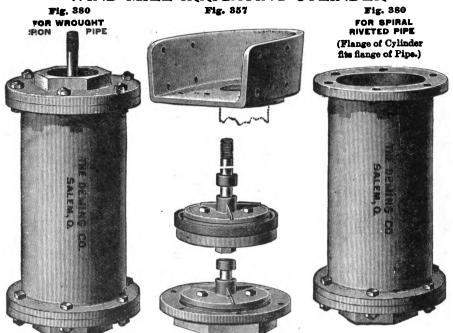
, Irrigating Cylinder, is intended for heavy duty and may be used in connection with any of our Power Working Heads or attached to Fig. 357—Spout connection illustrated above A discharge Spout similar to Fig. 357 may also be arranged by bolting a standard Pipe Flange to a Box or Wooden Trough and connecting the discharge Pipe to it. When Cylinders are operated by Wind Mills, such arrangements are very generally used. These Cylinders are especially adapted for both Irrigation and Drainage. Unless otherwise ordered, fitted top and bottom for Wrought Iron Pipe as listed. The top flange of cylinder is regularly drilled for Abendroth and Root Spiral Riveted Pipe flange.
